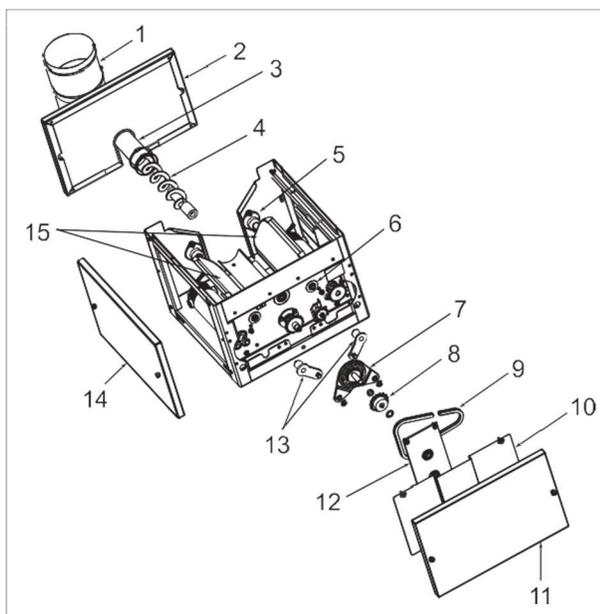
300 and 600 Agitation Paddles Disassembly
